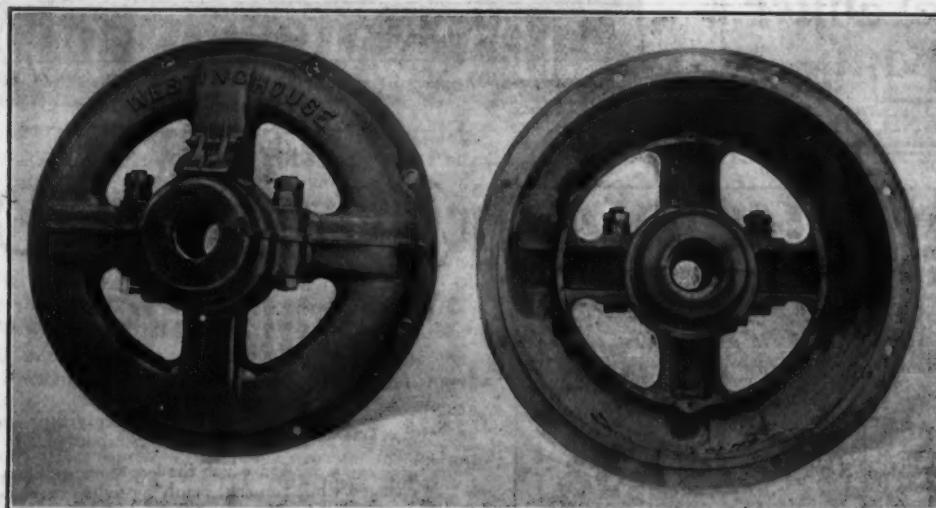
The Two Sides of One of the End Shields or Bearing Brackets.
